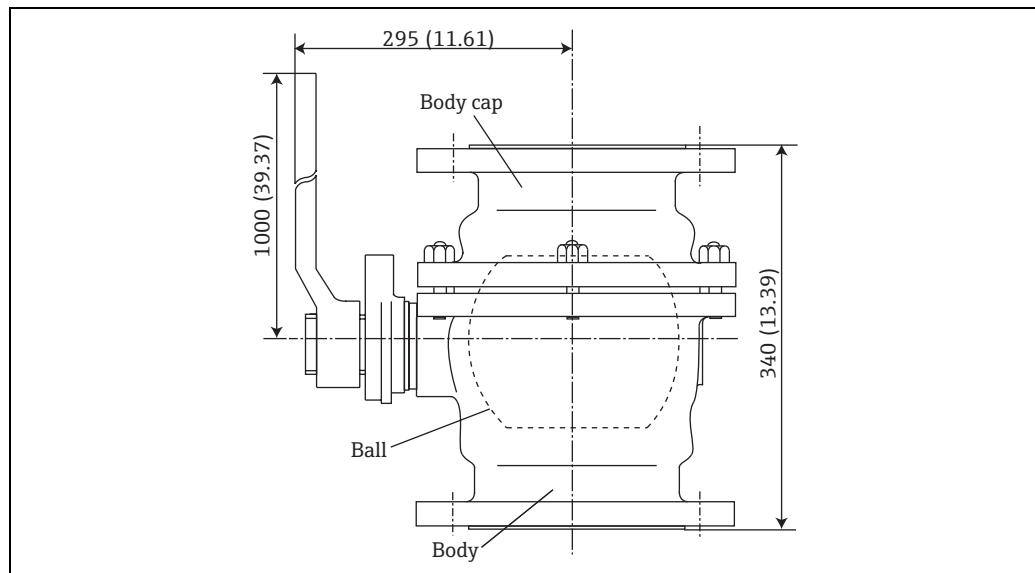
Ball Valve, Unit of Measurement: mm (in)
